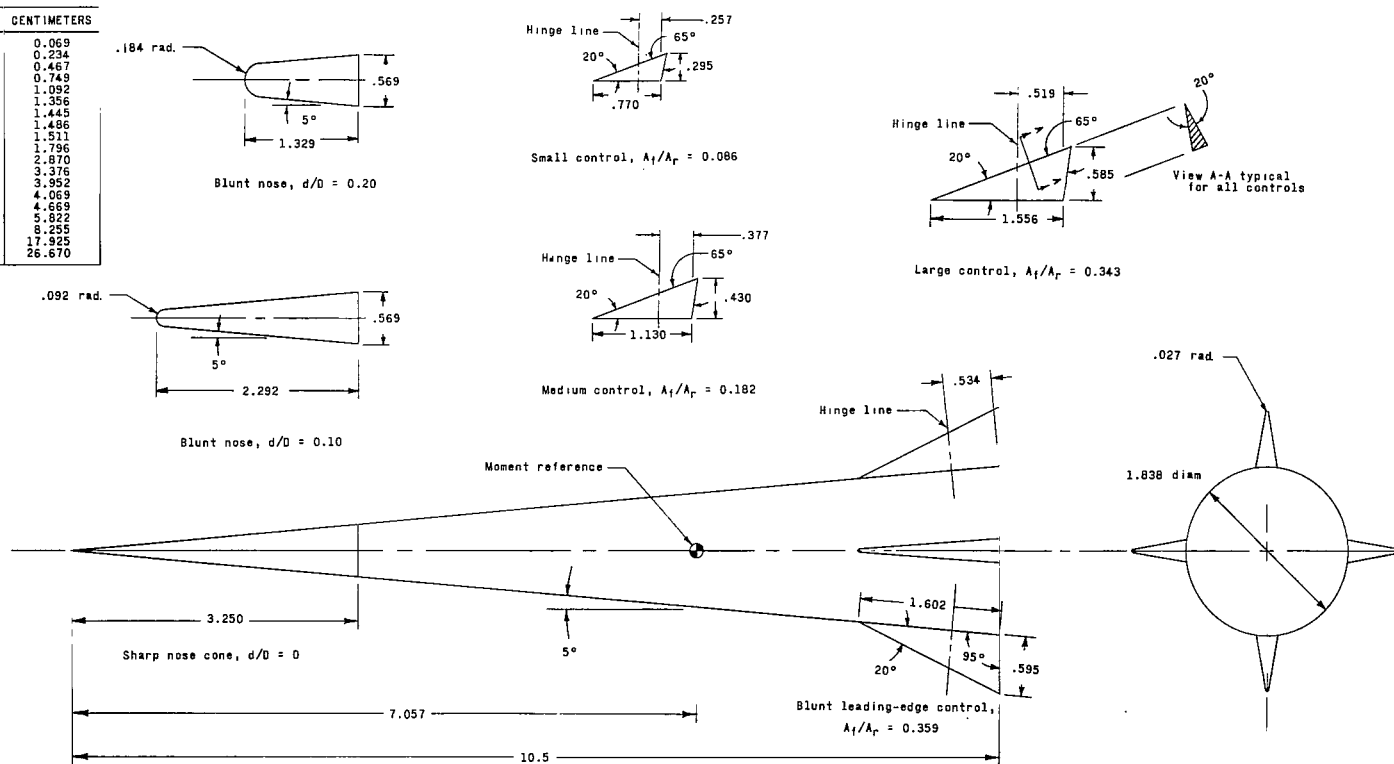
Model details. Dimensions on drawing in inches, dimensions in table in centimeters.
